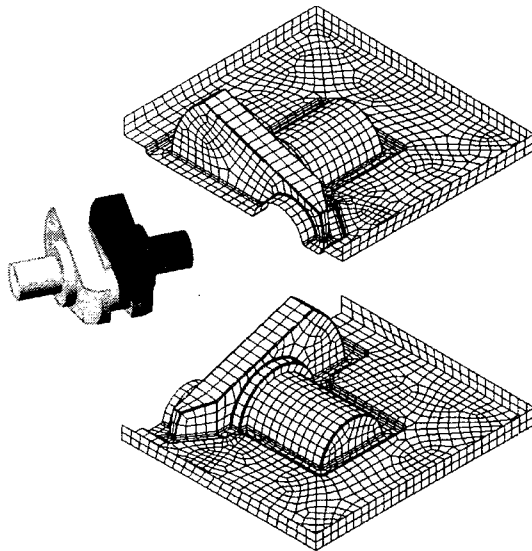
THE SHAPE OF A DIE USED IN FORGING OF A CRANK SHAFT.
